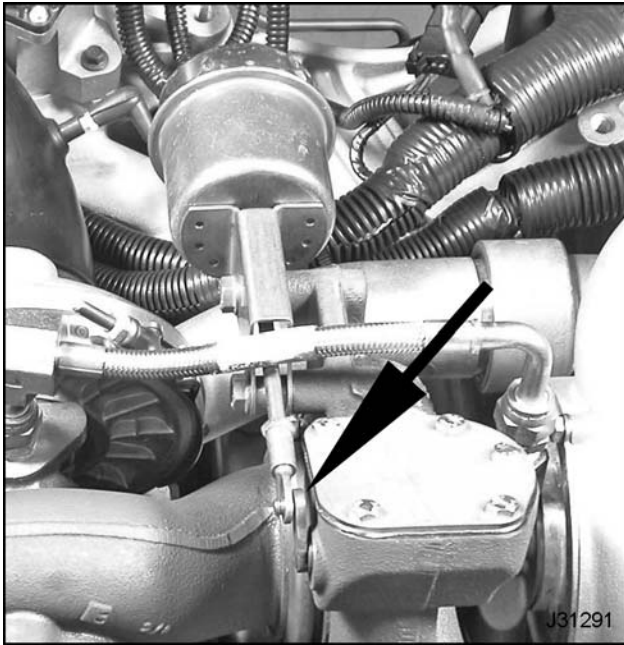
Turbocharger pneumatic actuator linkage connection to bypass valve
